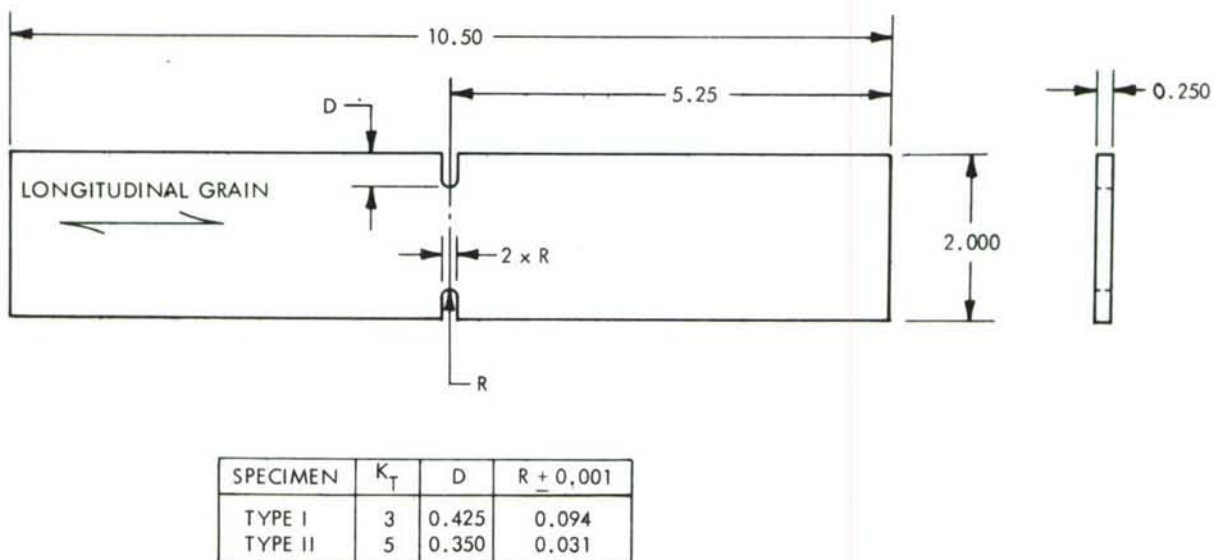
RECTANGULAR FATIGUE SPECIMEN
